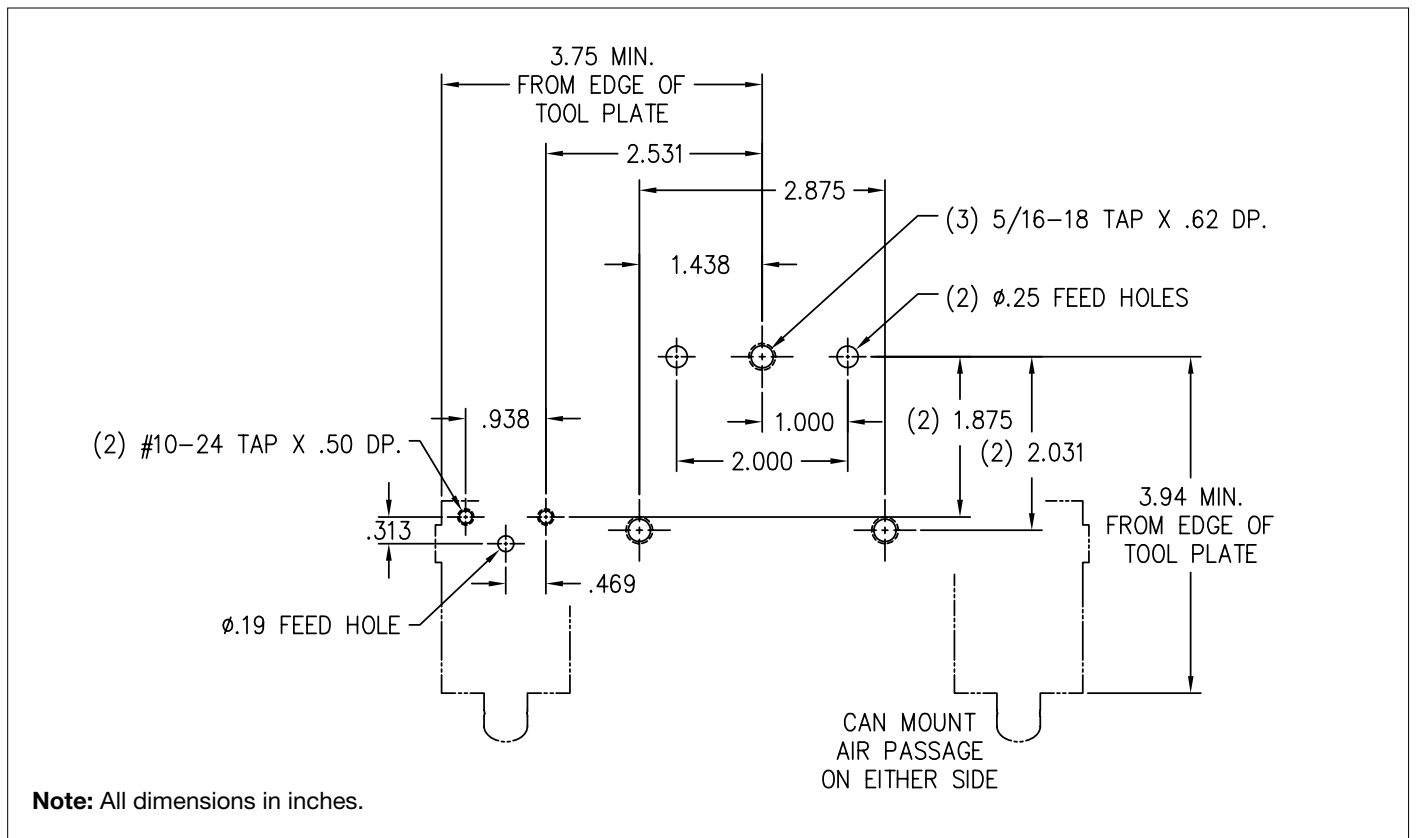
, Mounting Hole Pattern, MCRC21 Receiver with Pilot Operated Check Valve and MCRA11 Auxiliary Air Receiver
